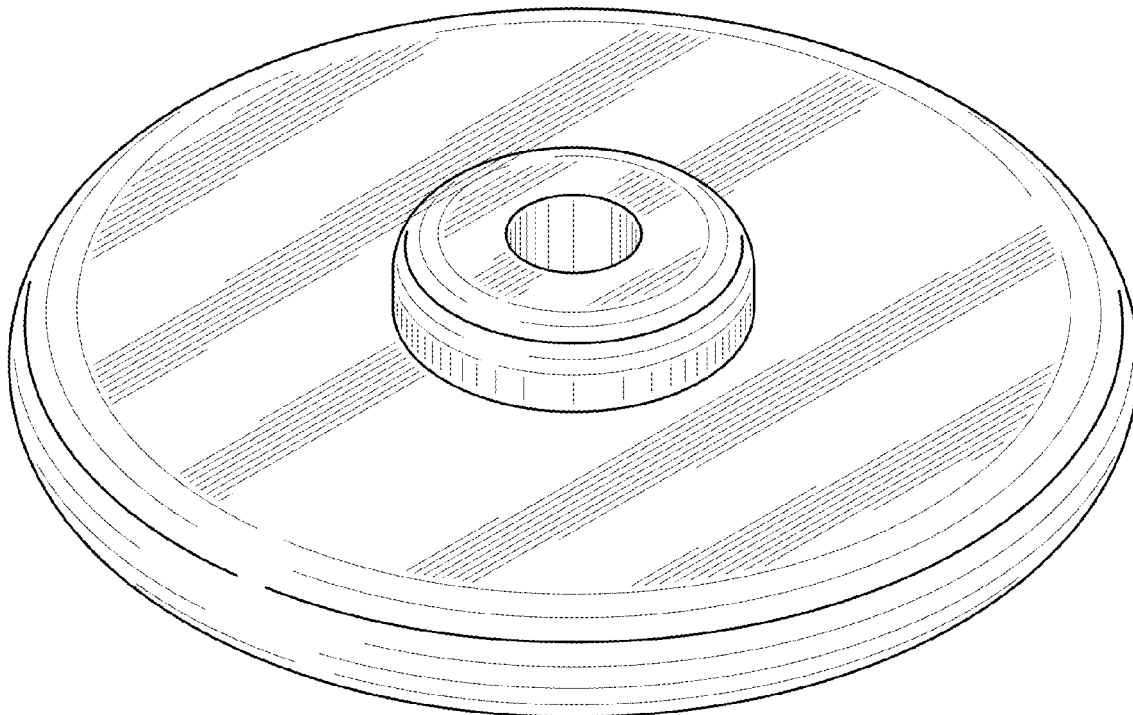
is a top, front, and right side perspective view of a magnetic disc for drill showing my new design;
